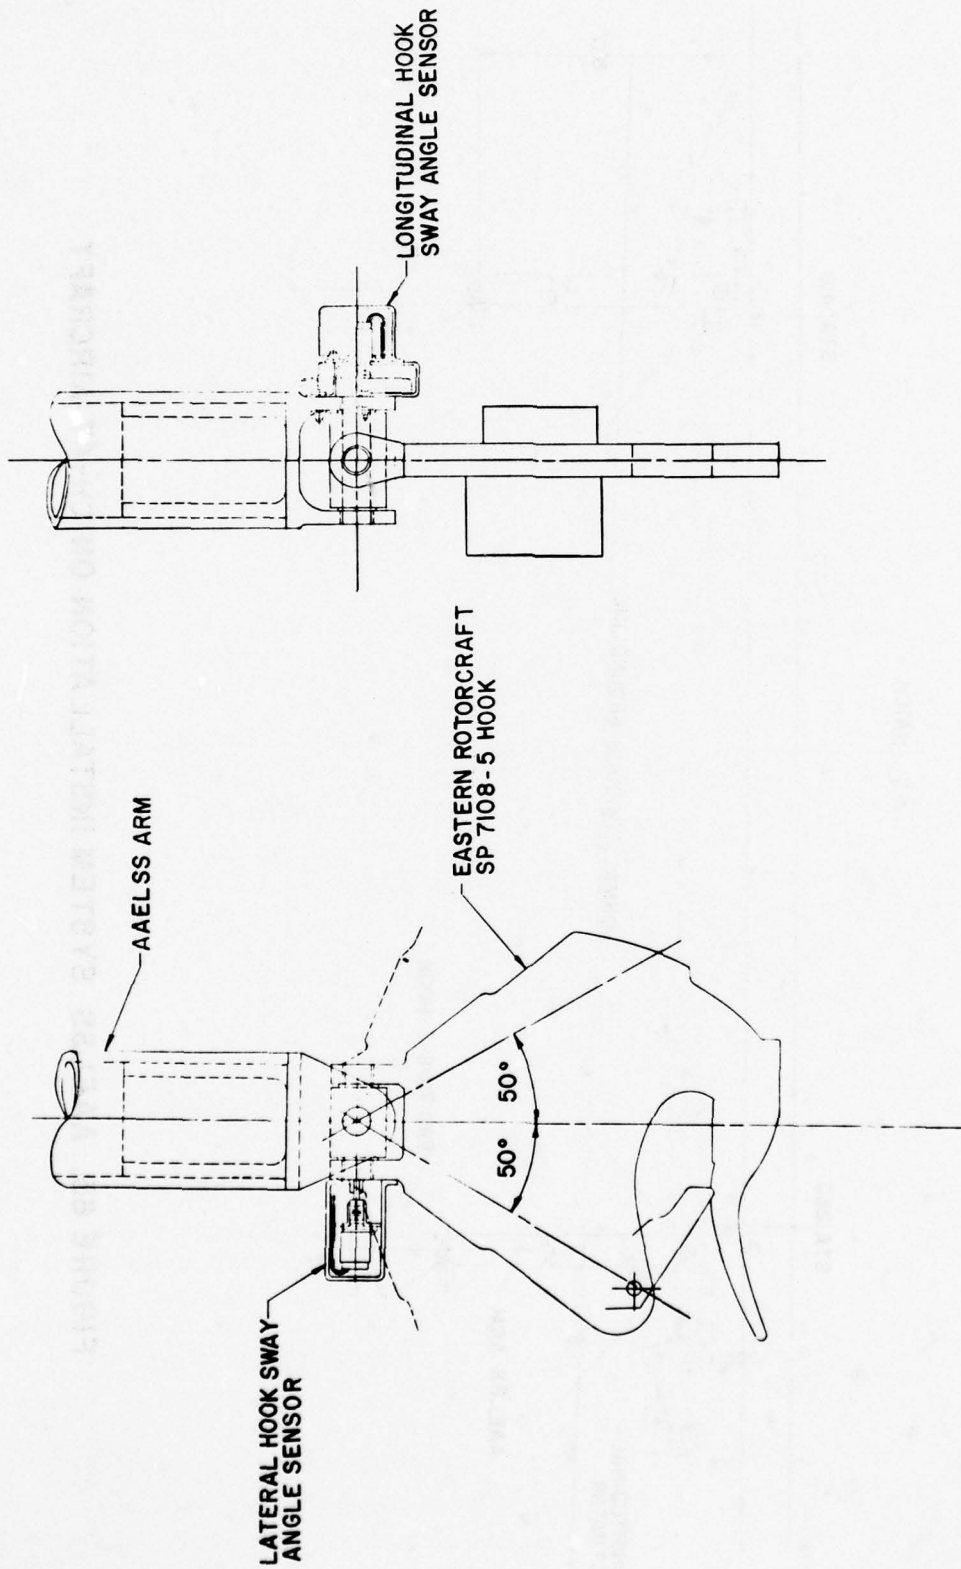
AAELSS LOWER ARM HOOK MOUNTING
